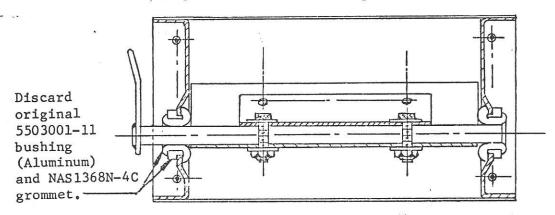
Section AA - Original Airbox Design with valve and bearings installed.
